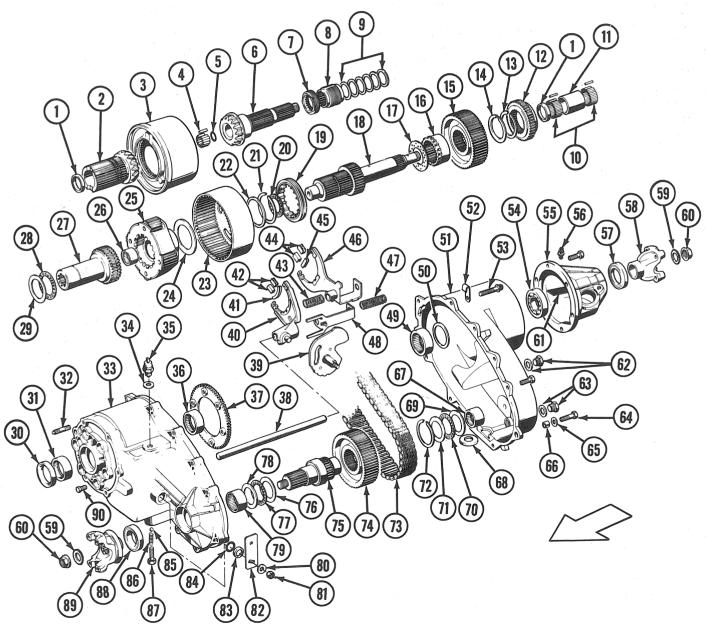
D-44 Model 219 Quadra-Trac Transfer Case
